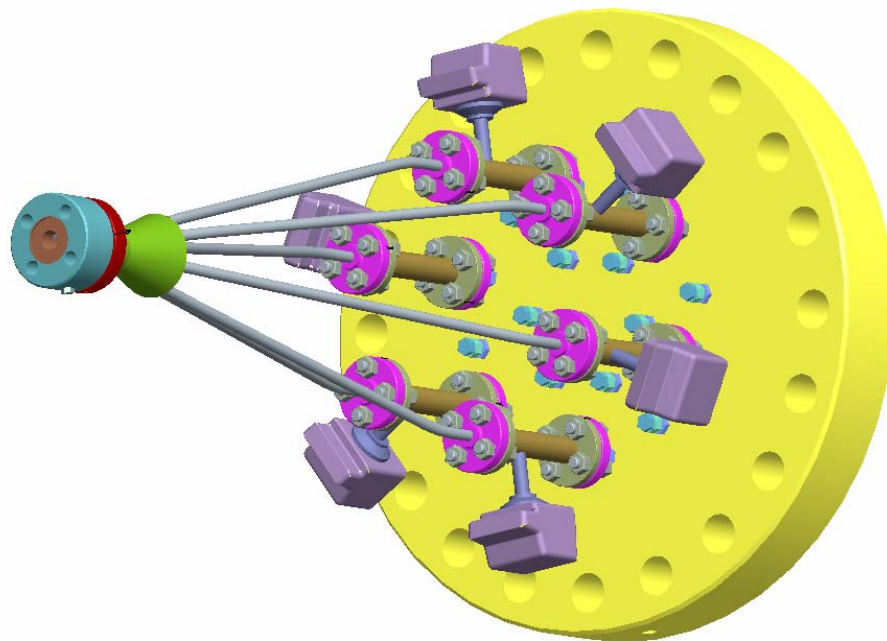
The 1x6 Multi-Element Injector (Drawing 7R110701A1)
